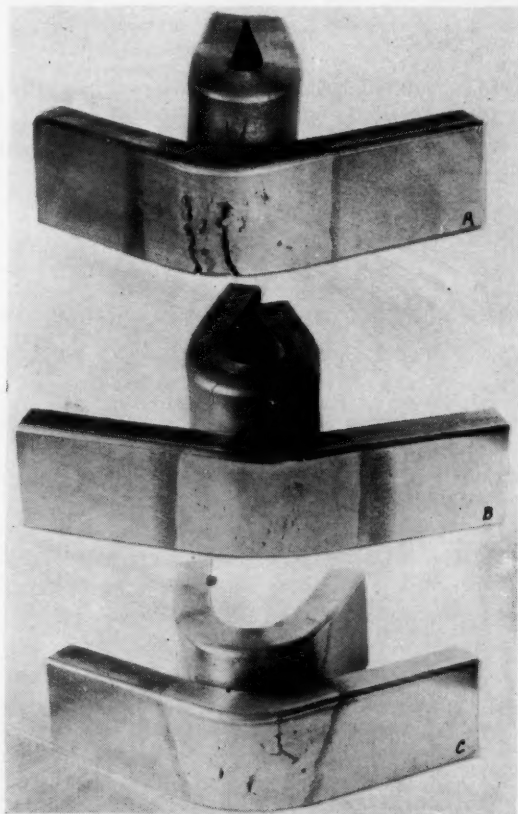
(A) FREE BEND SPECIMEN OF WELDED STEEL CASTING. ELONGATION BEFORE STRESS RELIEVING, 24 PER CENT. THE SAME SECTION STRESS RELIEVED 41 PER CENT ELONGATION. (B) ELONGATION BEFORE STRESS RELIEVING, 9 PER CENT. THE SAME SECTION STRESS RELIEVED 44 PER CENT ELONGATION. (C) ELONGATION BEFORE STRESS RELIEVING, 21 PER CENT. THE SAME SECTION STRESS RELIEVED 40 PER CENT ELONGATION.
